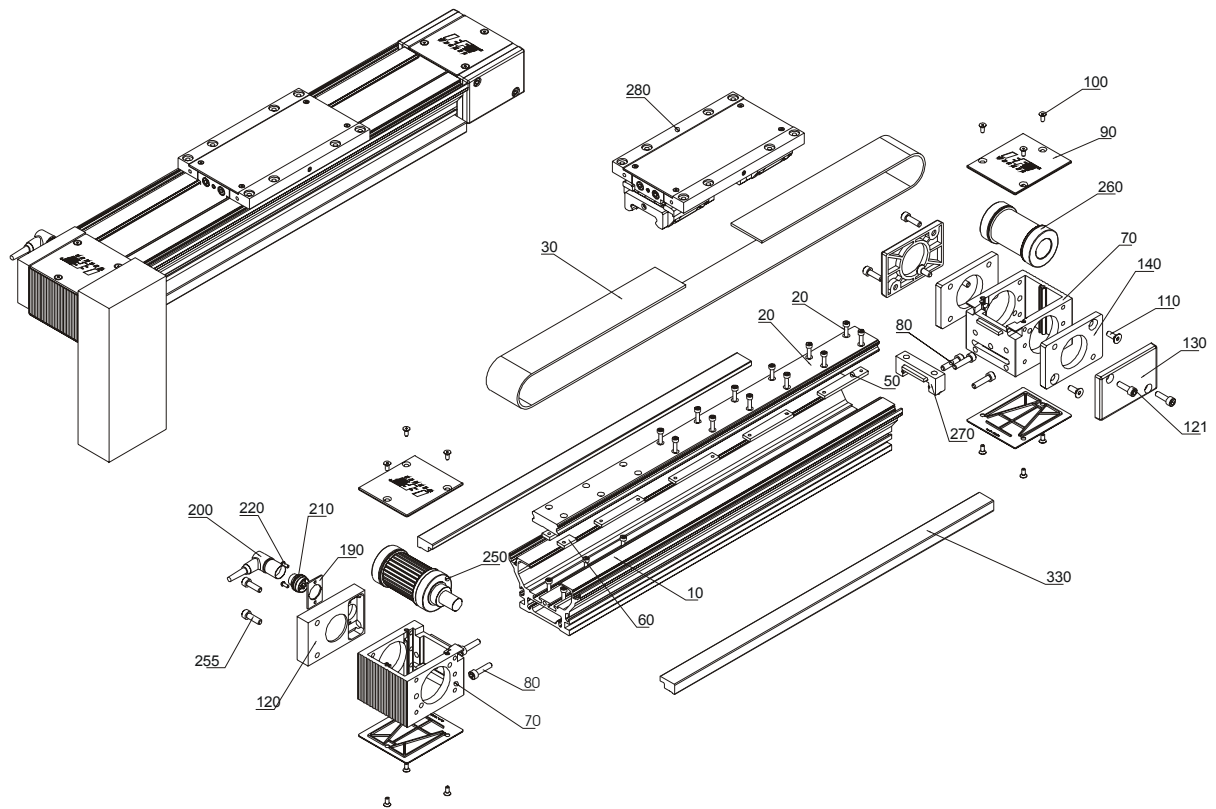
Modul 115/42, Installation Variant 1, Exploded View, Part group No. 100901
